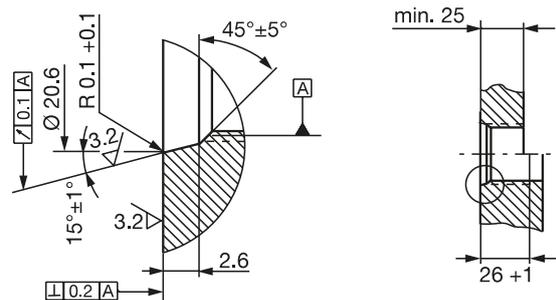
Mounting hole 3/4"-16UNF per SAE J475 O-ring 15.3x2.4
